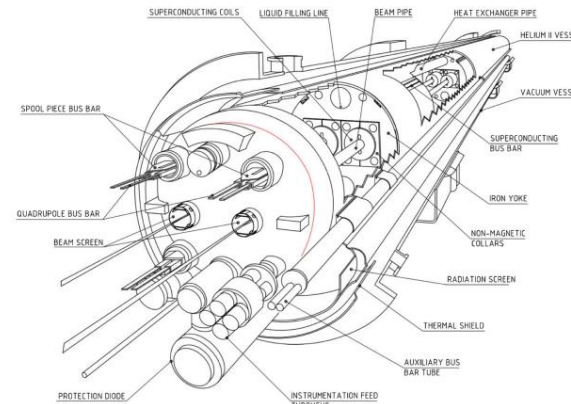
3D-view of main dipole cold mass assembly.
